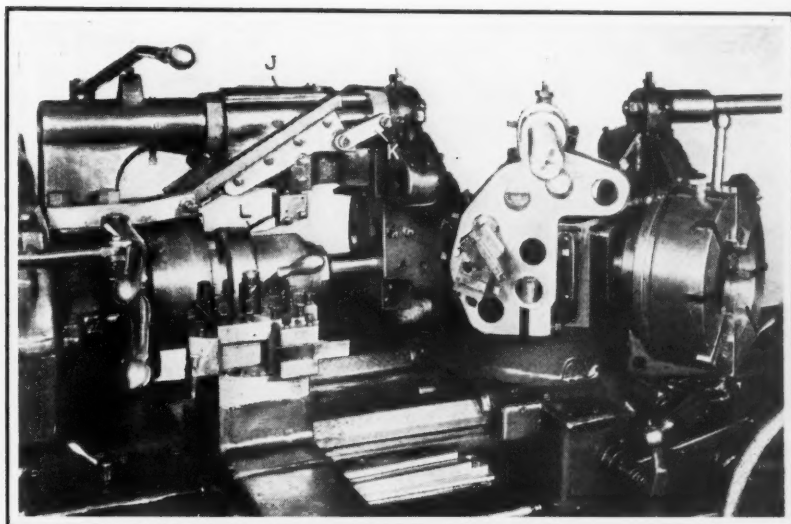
Close-up View of the Turret Lathe Tooling Equipment, taken from the Front of the Machine
